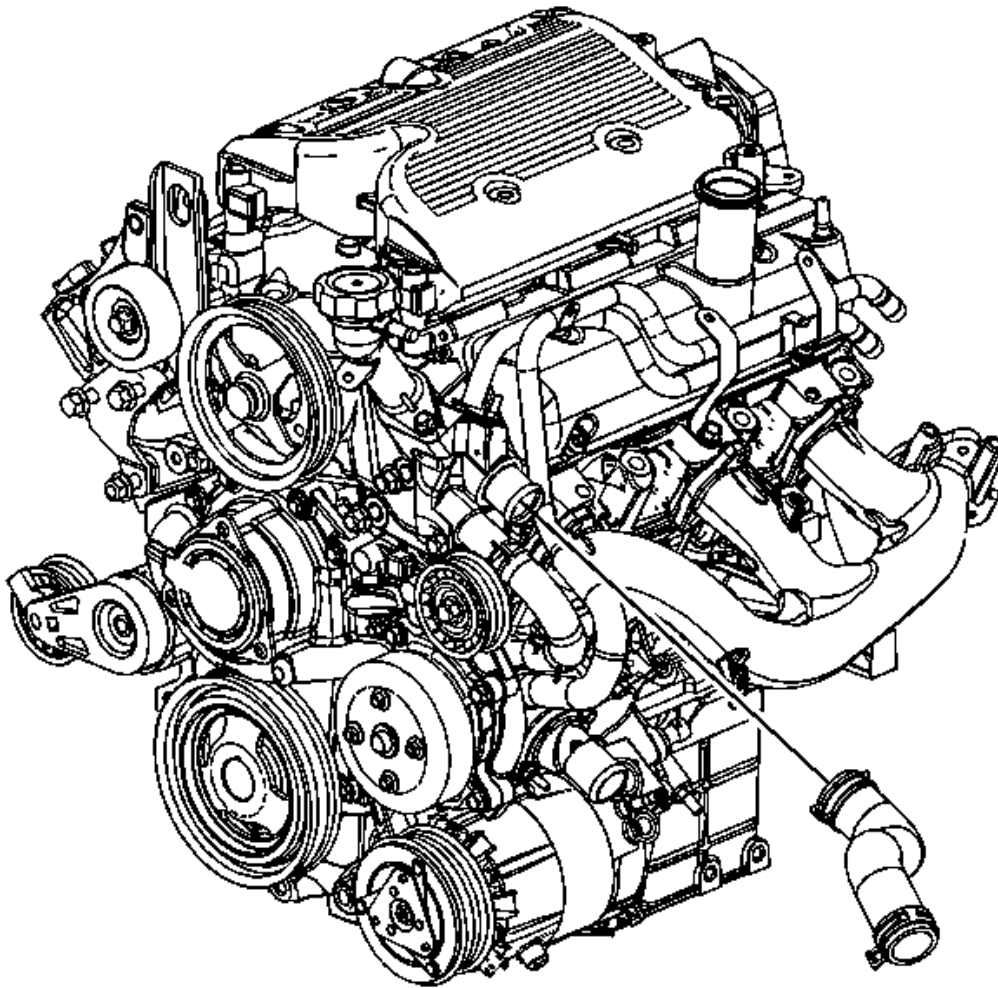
View Of Radiator Inlet Hose & Crossover Pipe
